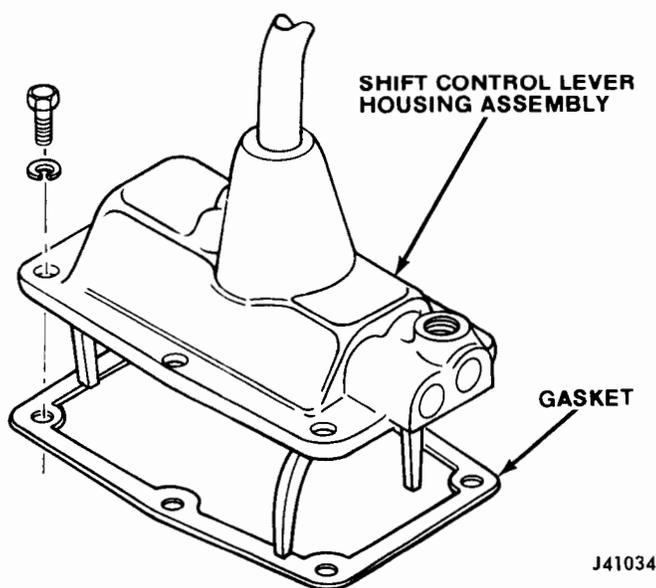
Shift Control Lever Housing Assembly Removal—3-Speed Transmission (T-15 Shown)
